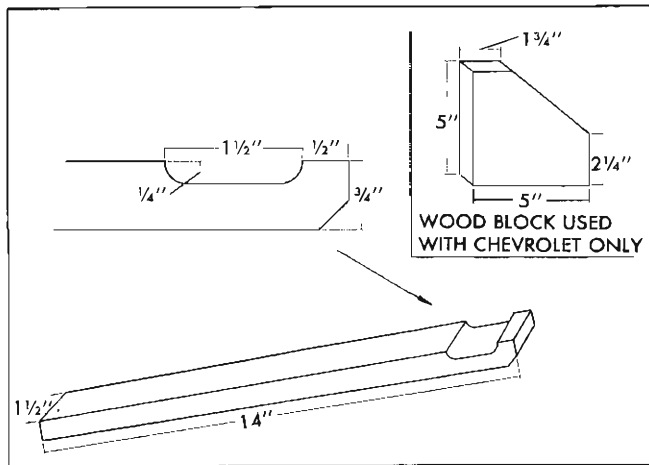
Spring Removal Tools—Chevrolet and Chevelle
